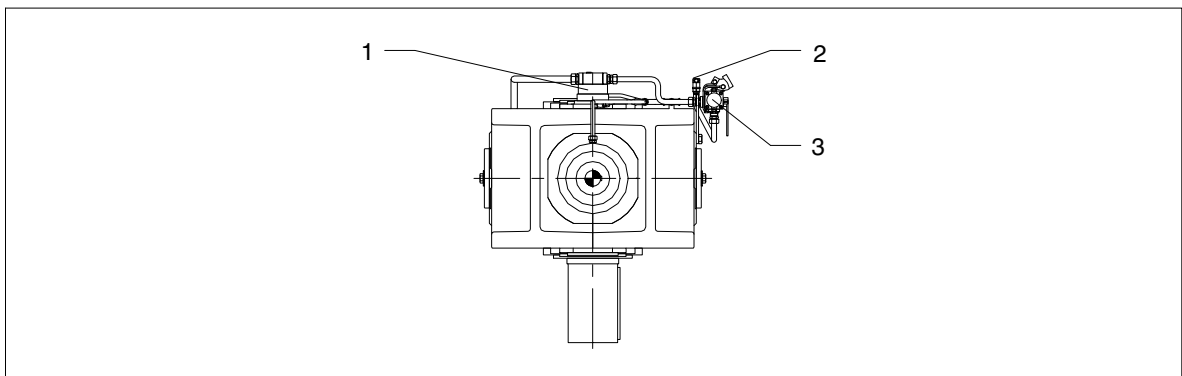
Add-on oil-supply system with flanged-on pump in case of type B..V
